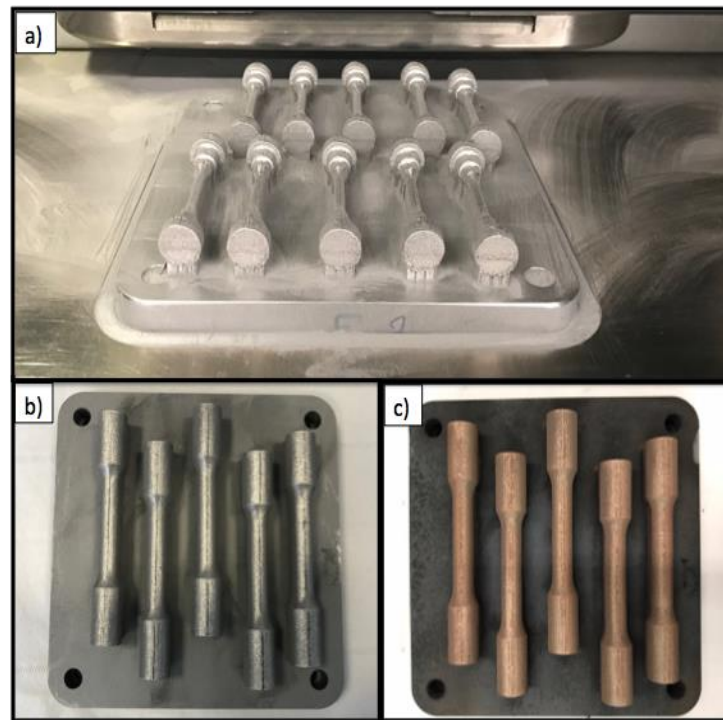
a) Tensile samples of geometry 1, b) tensile samples of geometry 2 in the as-built condition and c) after annealing
